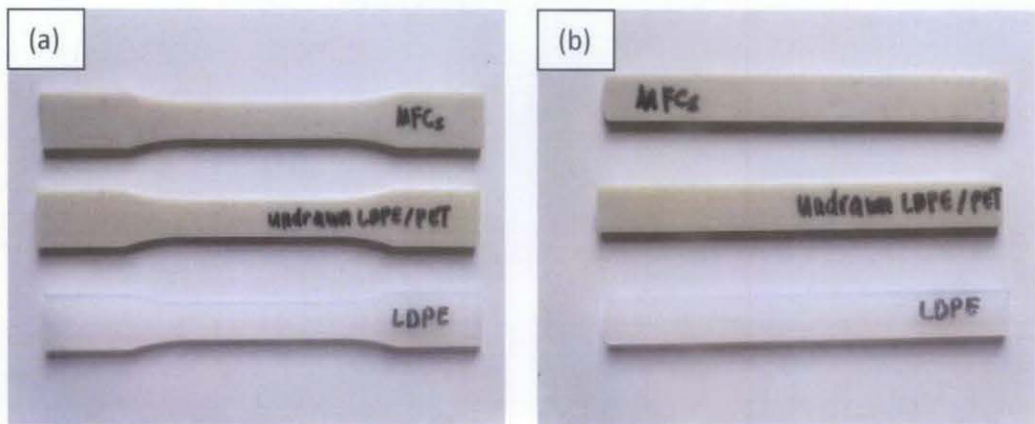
The sample (a) Dumbbell; (b) Bar sample after injection molding.
